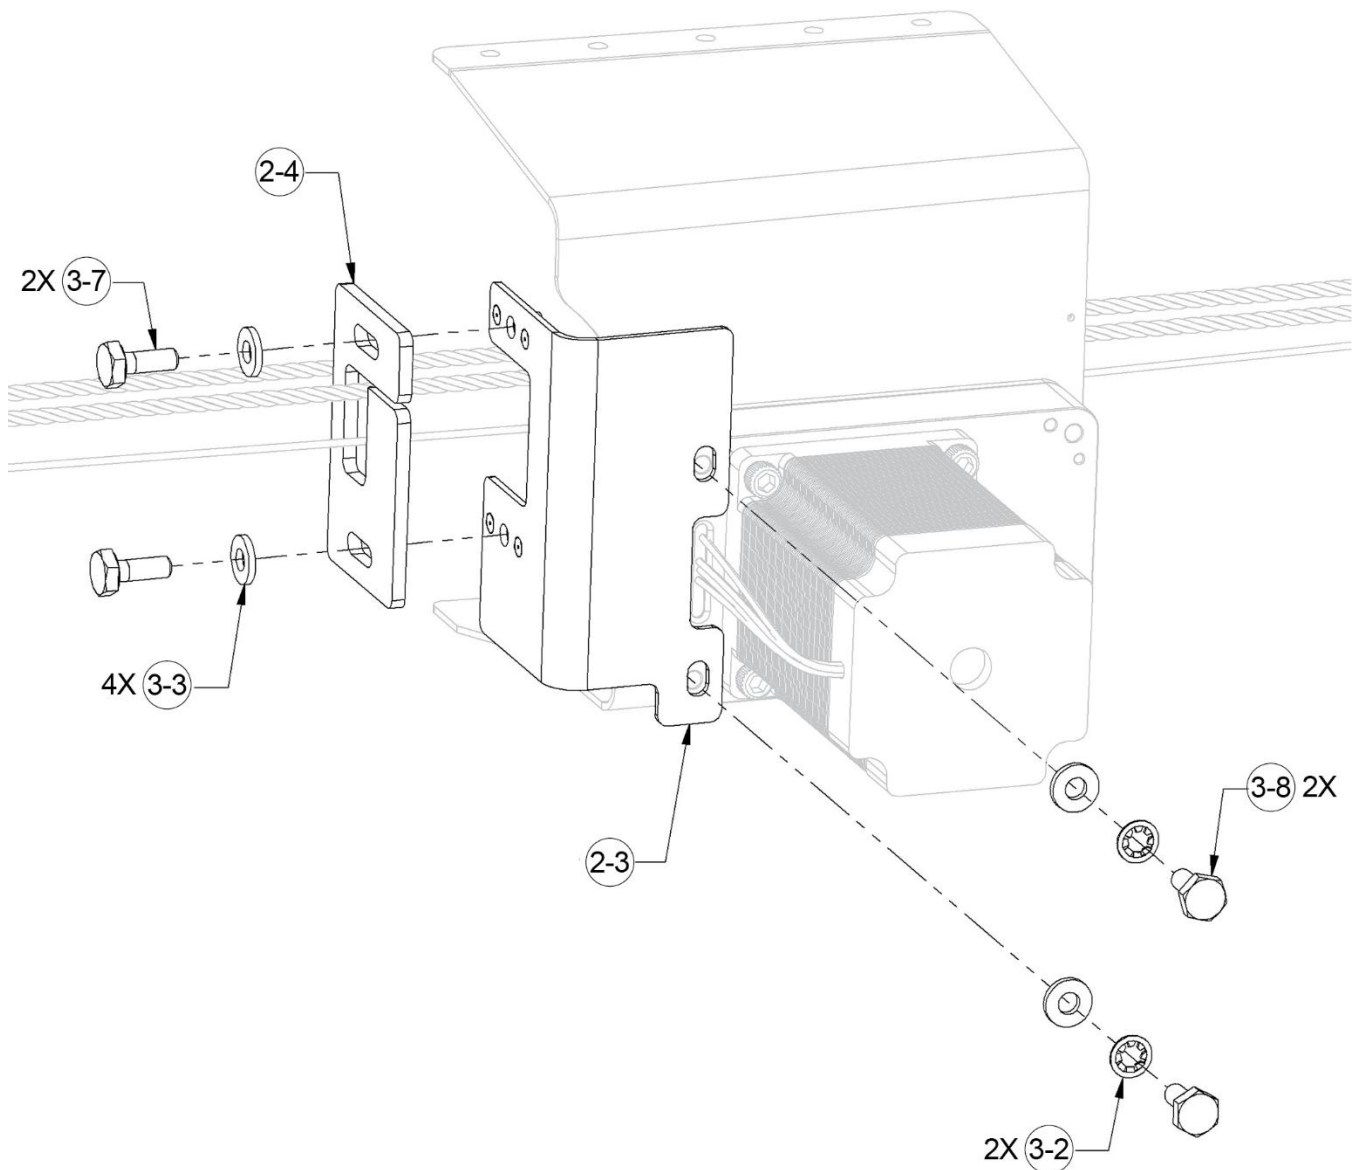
Attaching Cable Guard Bracket and Cable Guard to Roll Servo
